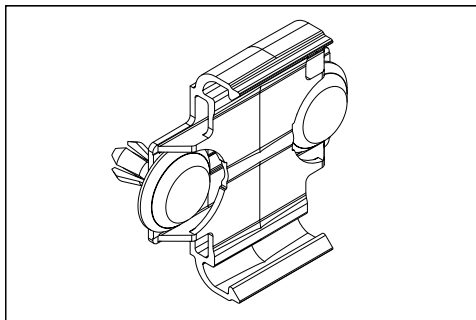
Hanger clamp with expanding rivet, 3-pole
